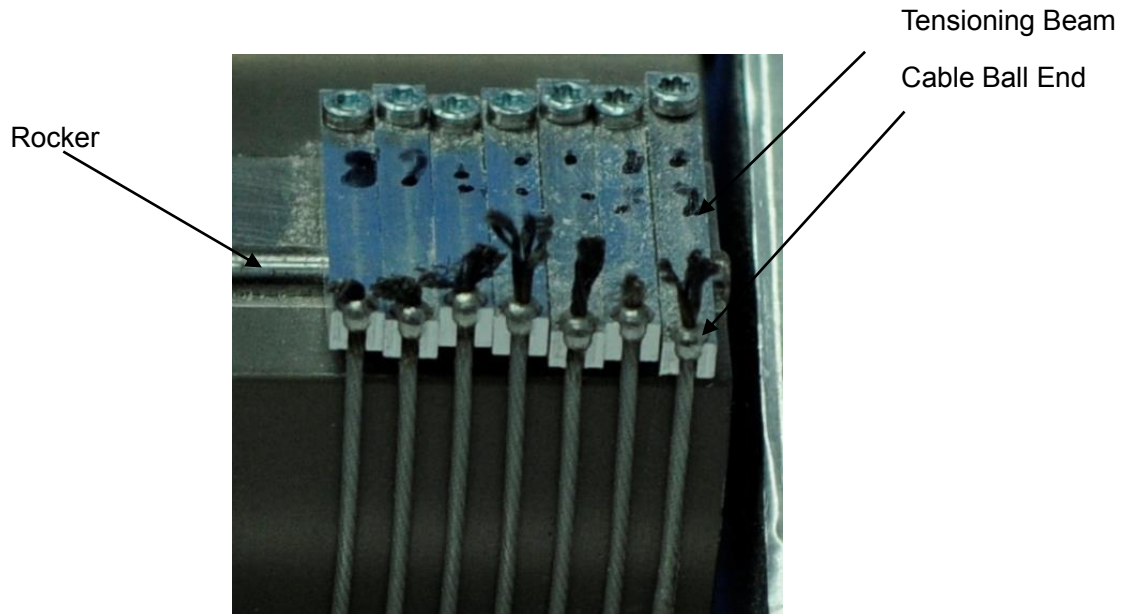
Photograph showing close-up view of cable tensioning mechanism and cable termination.
